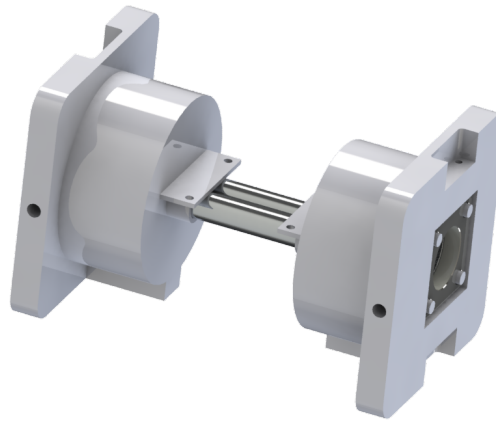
3D view of the constructed photoacoustic cell. Gas inlet and outlet are not shown.
